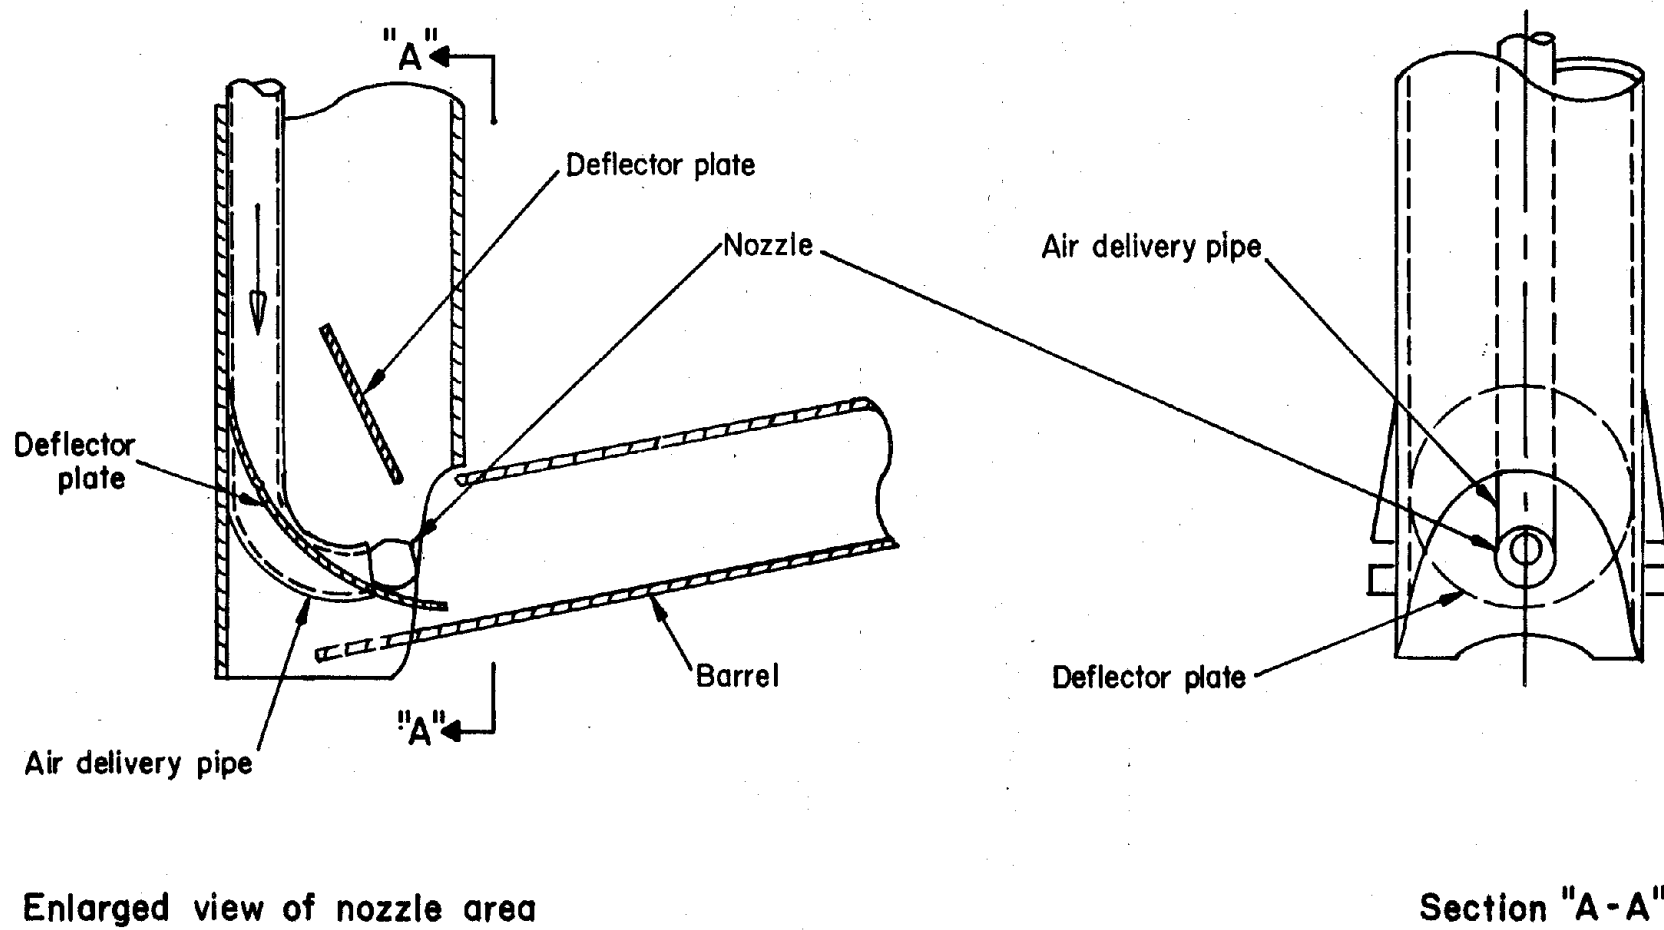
Enlarged view of nozzle area and detail section A-A.
